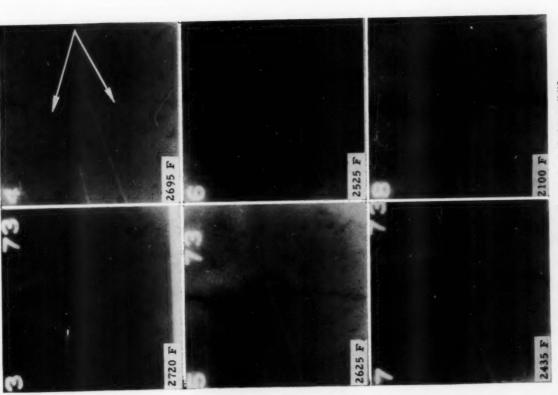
Series of radiographs obtained during solidification and cooling of 0.17-pct C steel test casting.
